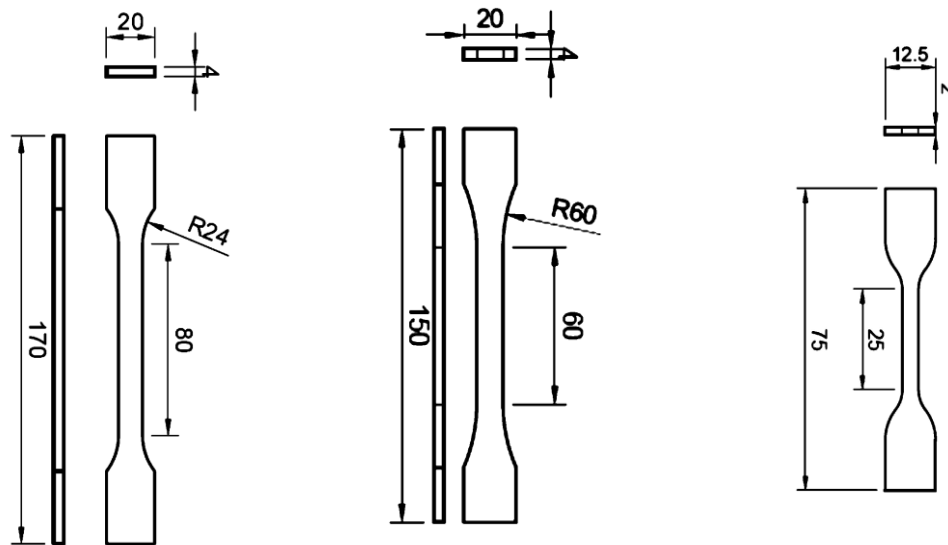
Sketch of ISO-527 specimens Types 1A & 1B and ISO-37 specimens Type 2
